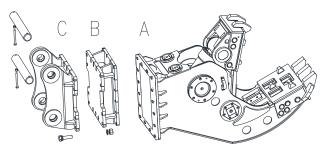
A) ASP, B) Adapter, C) Mounting Bracket
